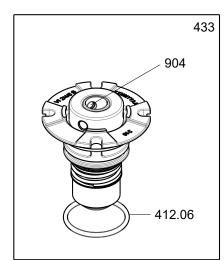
[TPG-20120136-C]: Fitting the mechanical seal
